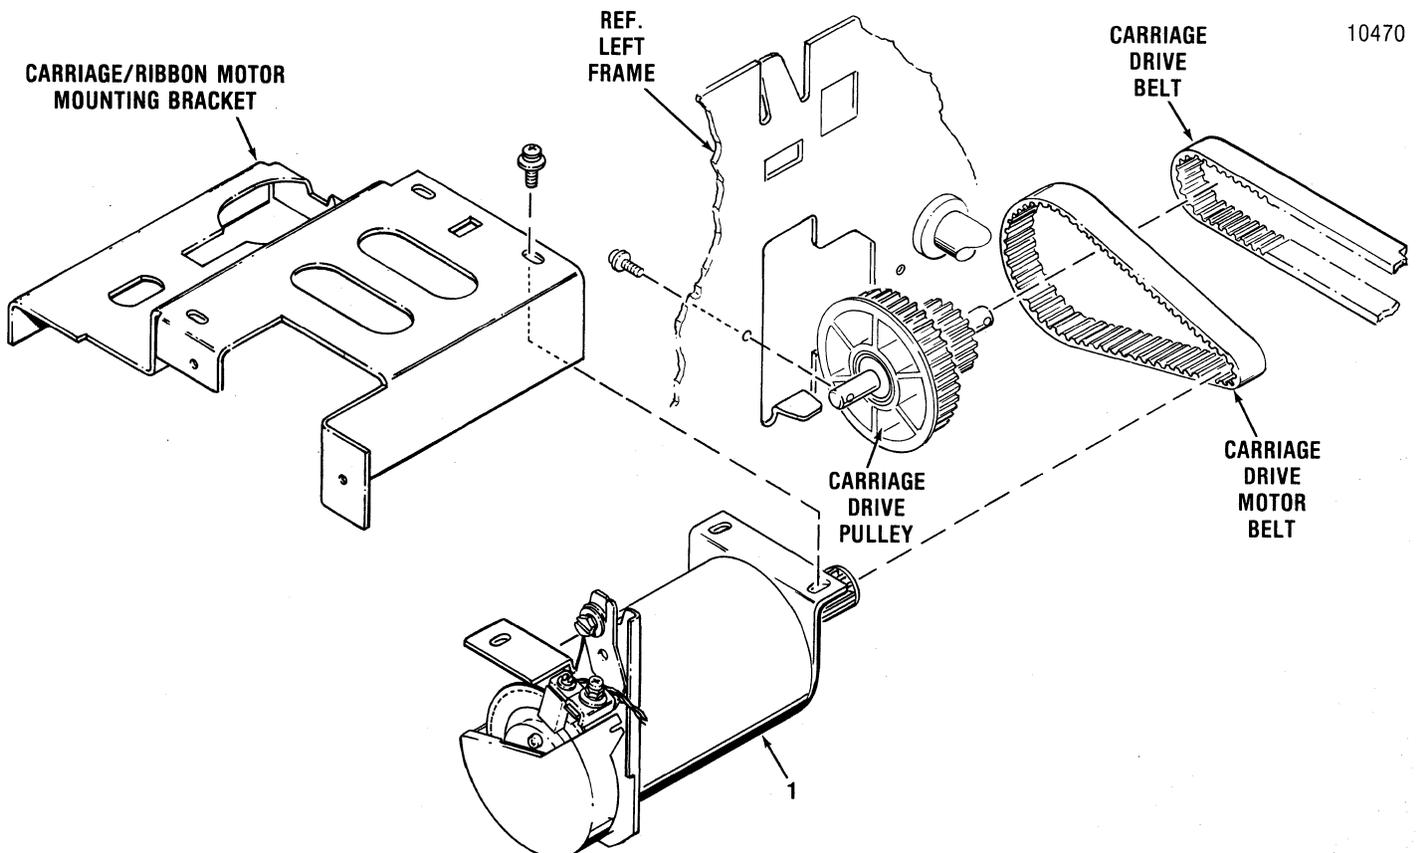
REMOVAL/REPLACEMENT, CARRIAGE DRIVE MOTOR
